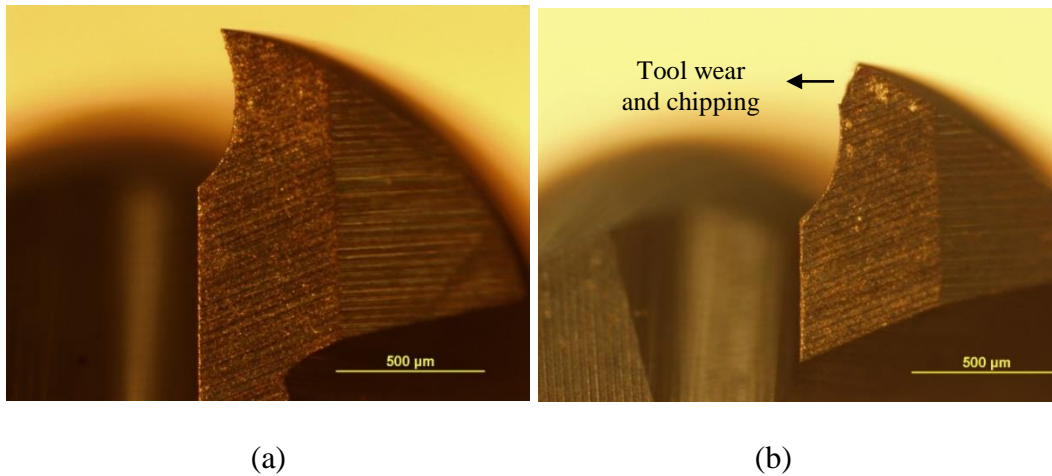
(a) Uncoated WC tool before machining (b) Tool chipping and wear observed on uncoated WC tool. Machining 4 consecutive slots, 32 mm length, 15 m/min and 80 m/min speed, 15 μm /tooth chip load, dry and MQL, 50 μm and 100 μm depth, A36 carbon steel.
